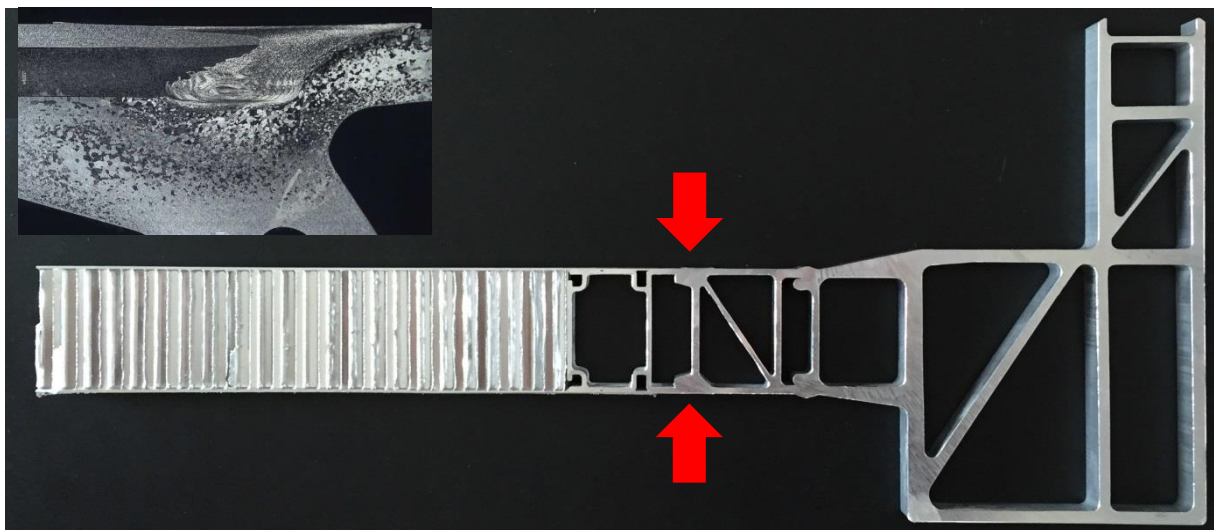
Sandwich design of a railcar with hollow extrusion profiles designed for Friction Stir Welding (red arrows) and macro detail of multi-sheet joint design [19, 20]
